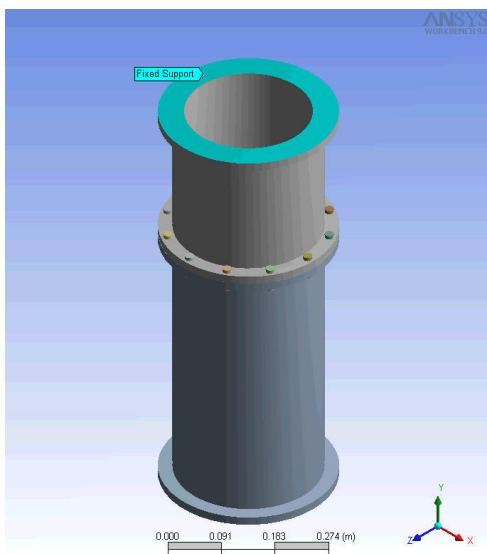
Flanged bolted cylinders showing rigid fixed support.
